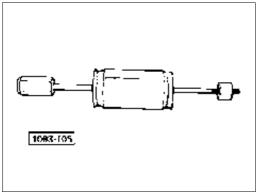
No. 5.9030.618.4 tool used to remove injection nozzle from seat.
